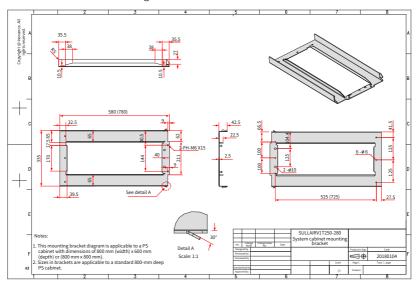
Dimensions of the mounting bracket for 250–280 kW models (standard configuration)
